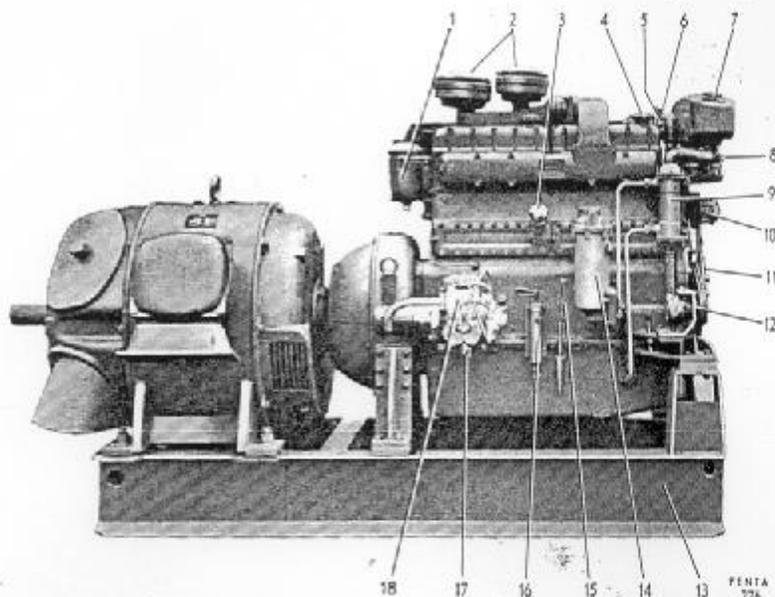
MD 96 auxiliary unit with compressed-air starter motor.
